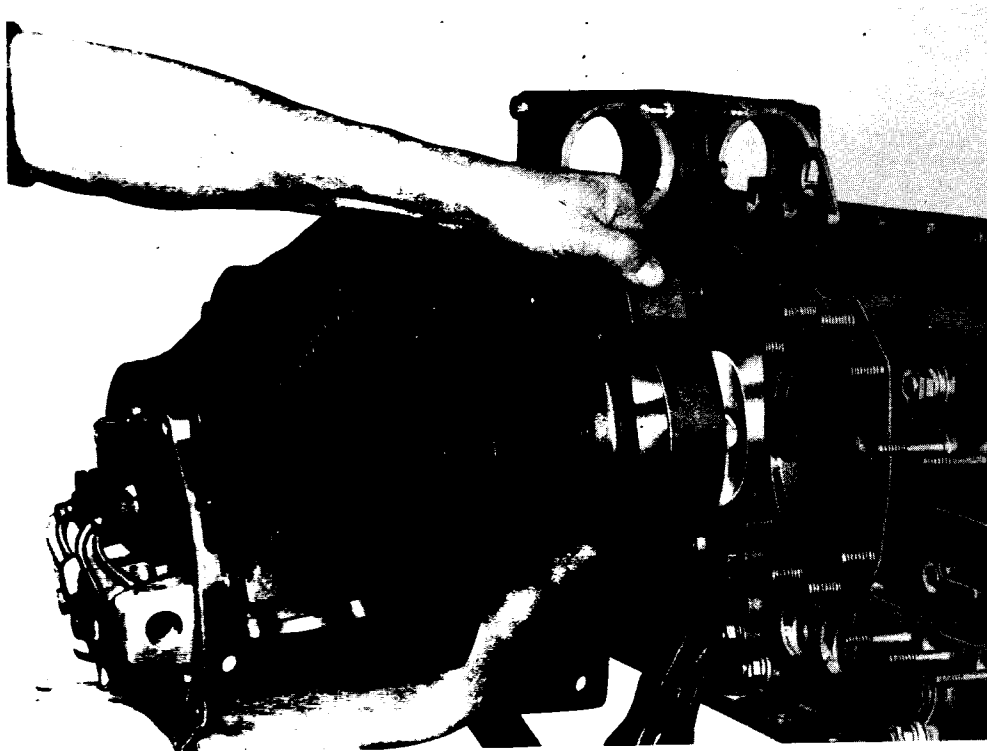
Installing No. 5 Cylinder and Piston Assembly
